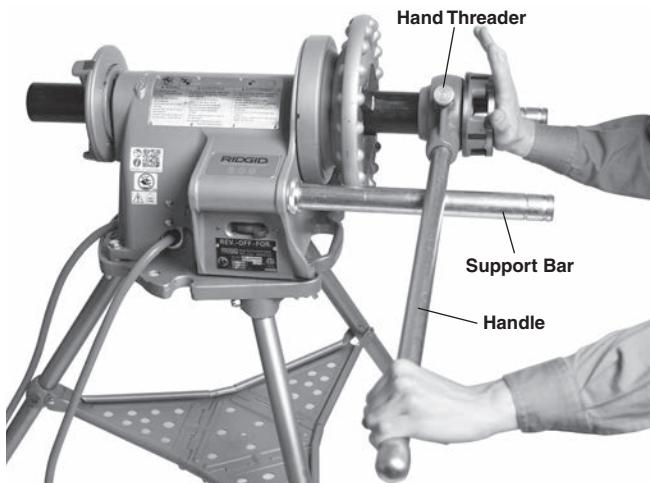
Pushing Hand Threader onto Pipe to Engage Dies
